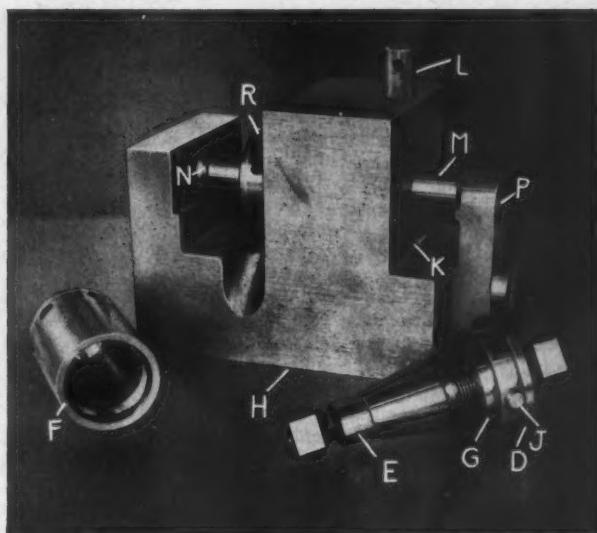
For milling, the axis pin blanks are gripped in collet-type holders, one of which is seen dismantled in the foreground, with a milled component inserted in the body. A special fixture, as seen at the rear, is used for loading, to facilitate location and clamping of the workpiece
